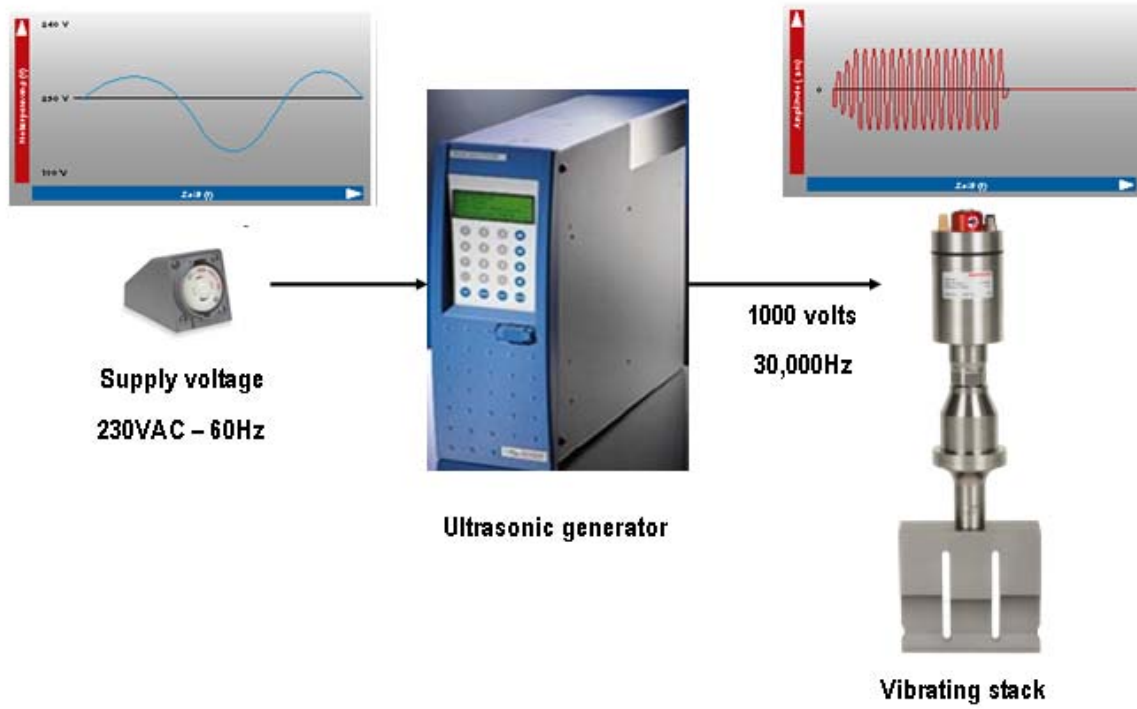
Diagram of welding fixture and vibrating stack
